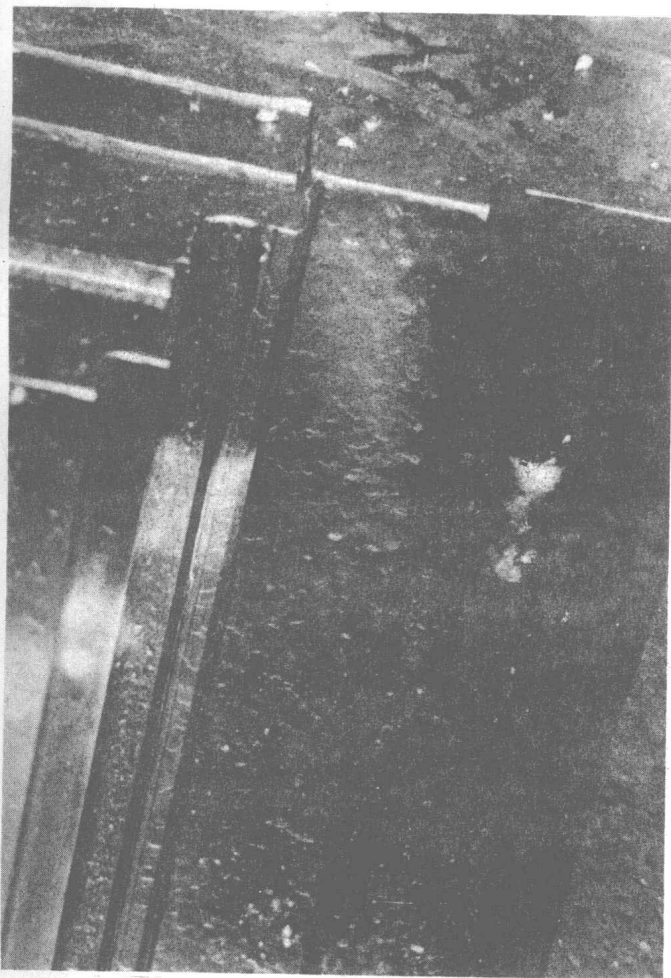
View of Turbine Shell Casting Illustrating Sharp Internal Radii.
